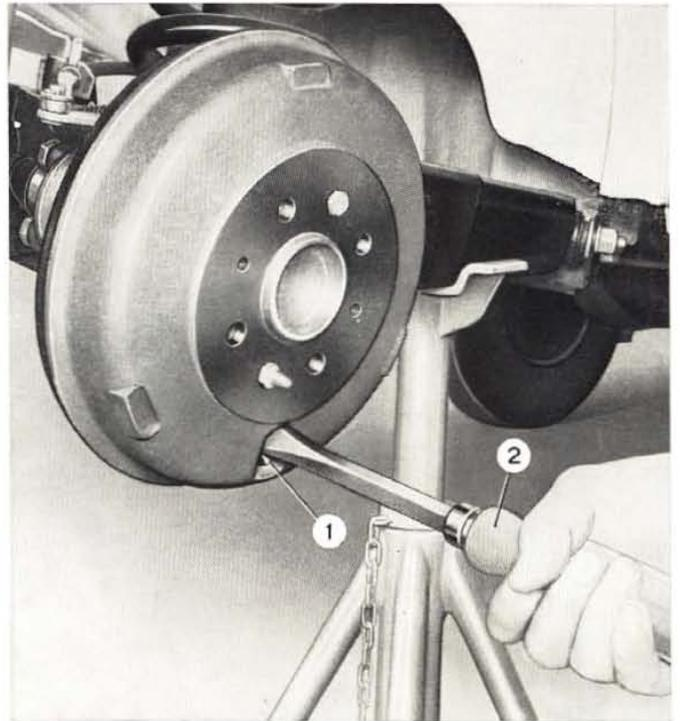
Checking shoe-to-drum clearance at right side rear wheel.
